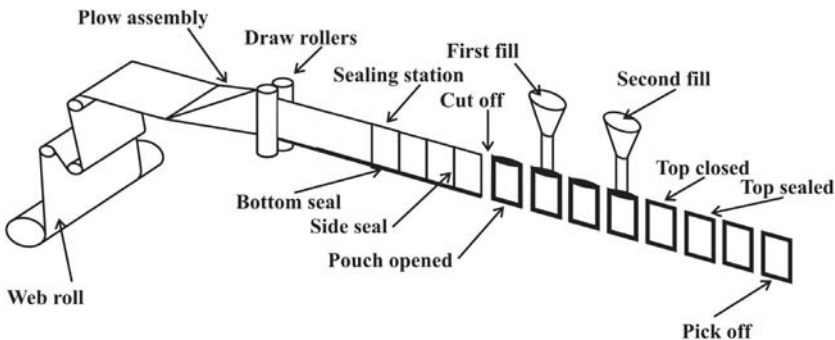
Operation of a horizontal-form-fill-seal machine.
